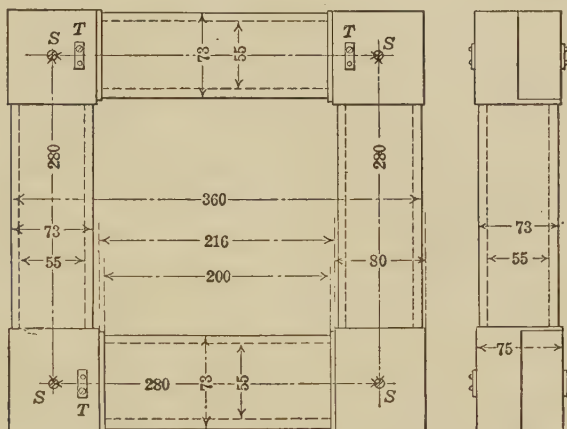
Outline sketch of one coil. Dimensions in millimeters.
